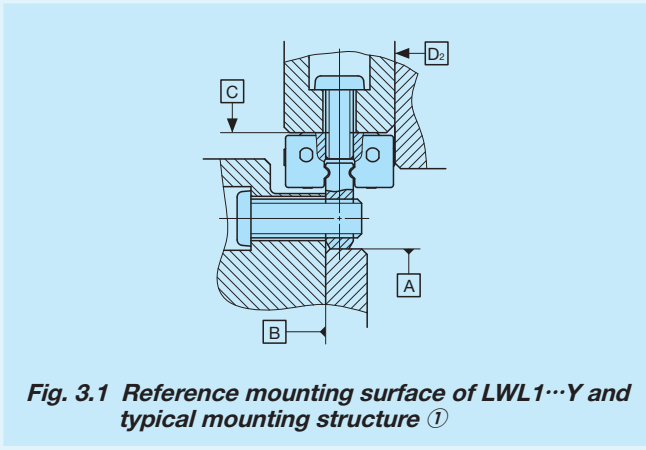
Reference mounting surface of LWL1...Y and typical mounting structure ①
